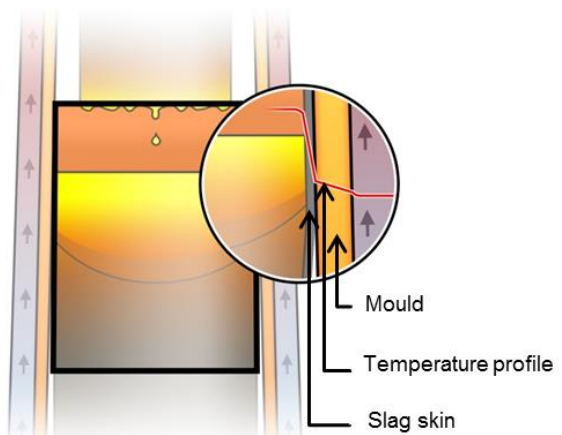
Heat removal by water cooled copper mould during the ESR process [15]
